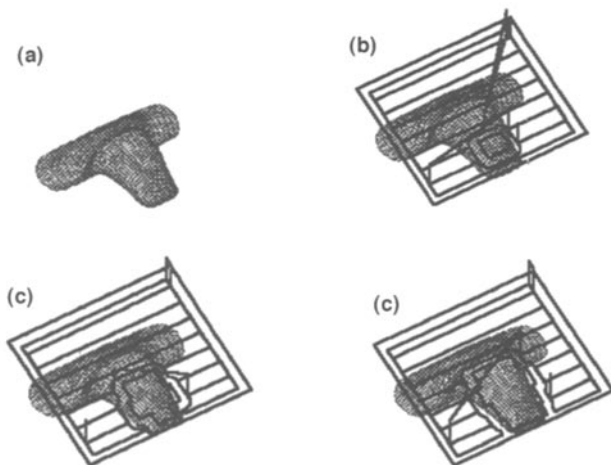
Rough cut for a water tap. (a) Surface shape. (b) Tool path of first layer. (c) Tool path of second layer. (d) Tool path of third layer.
